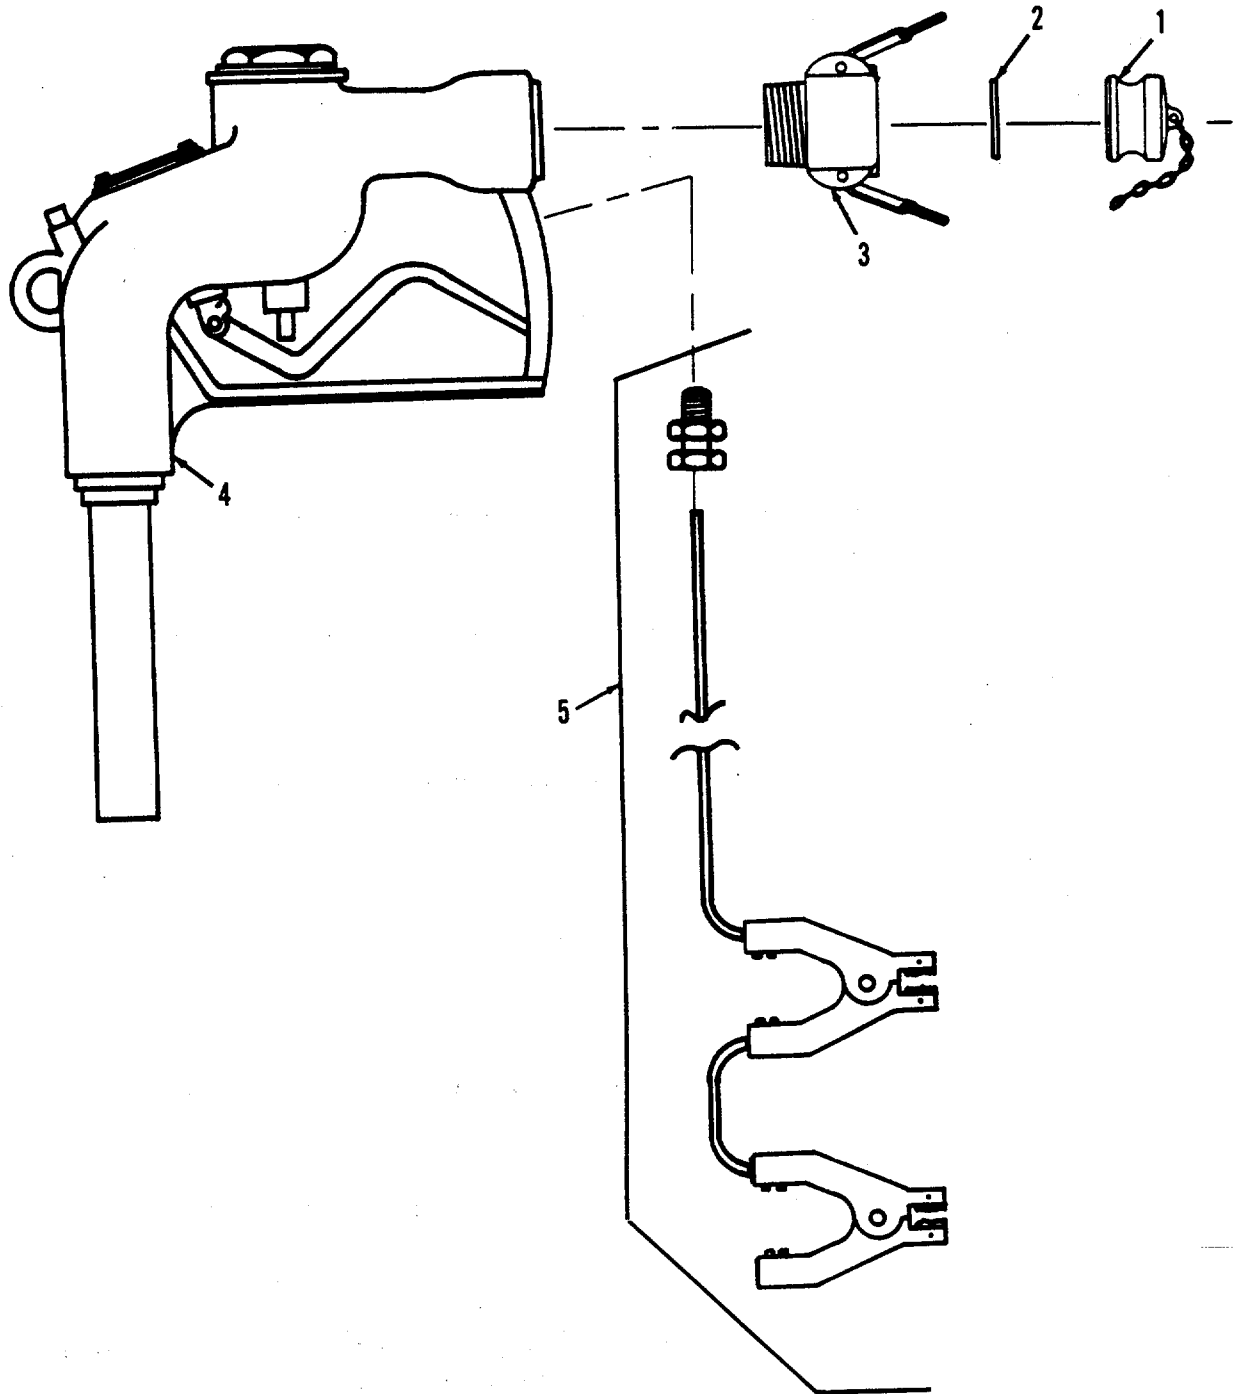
Nozzle Assembly, 1.50 Inch.
